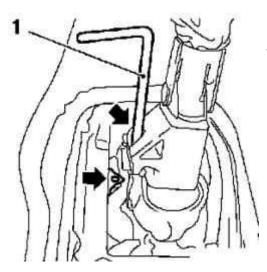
Install the locking mechanism of the gear lever: 1 - fixing mechanism
